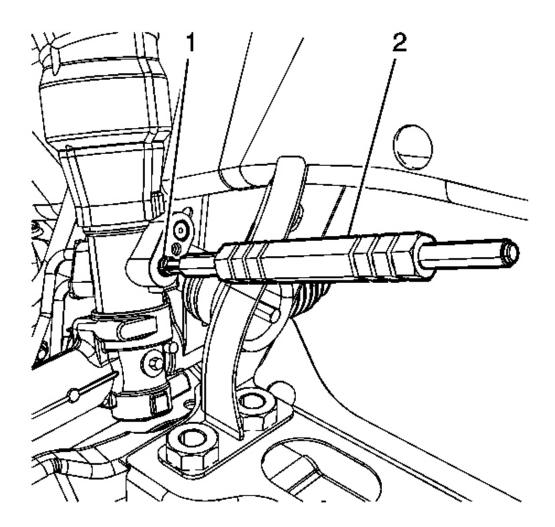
Identifying Seal Extractor J 44586 Courtesy of GENERAL MOTORS CORP.
